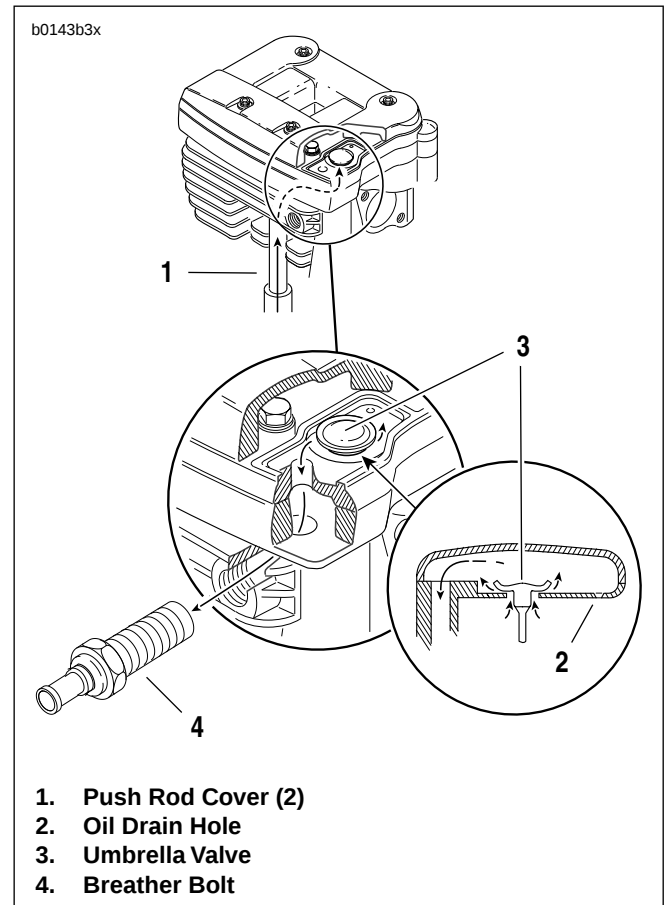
Crankcase Breathing System, Typical Cylinder
